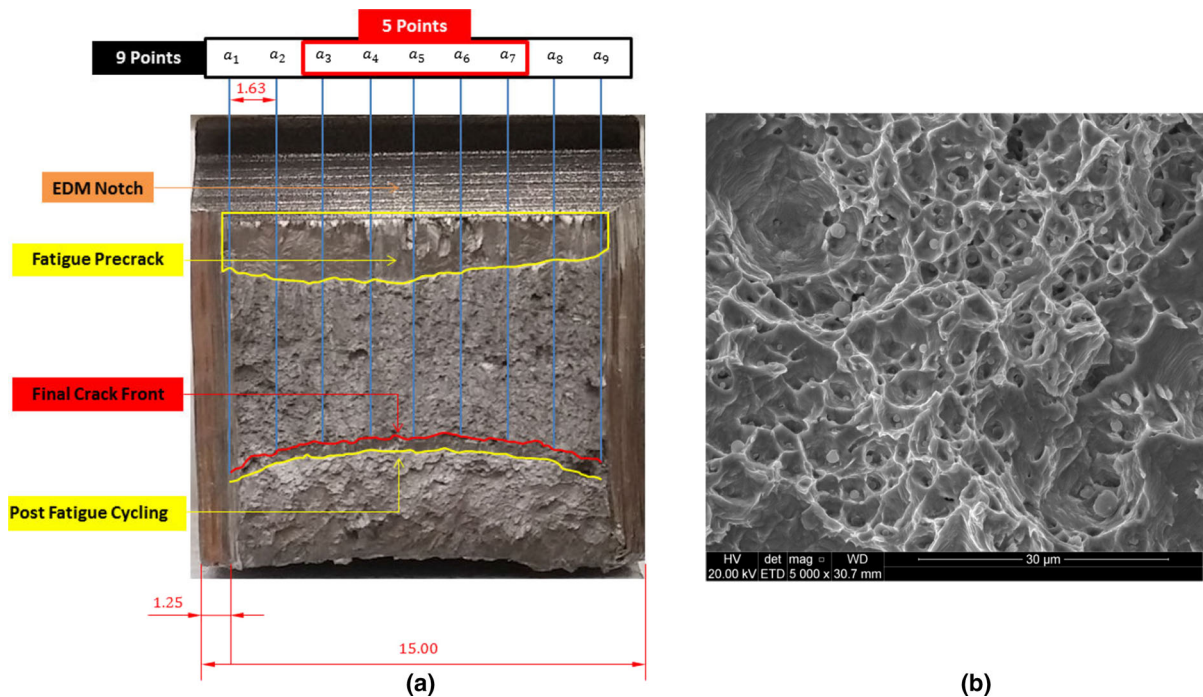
a Typical crack surface and the optical crack size measurement profile. b Typical fracture surface morphology observed by a scanning electron microscope (SEM) showing small inclusions within a dimple structure
